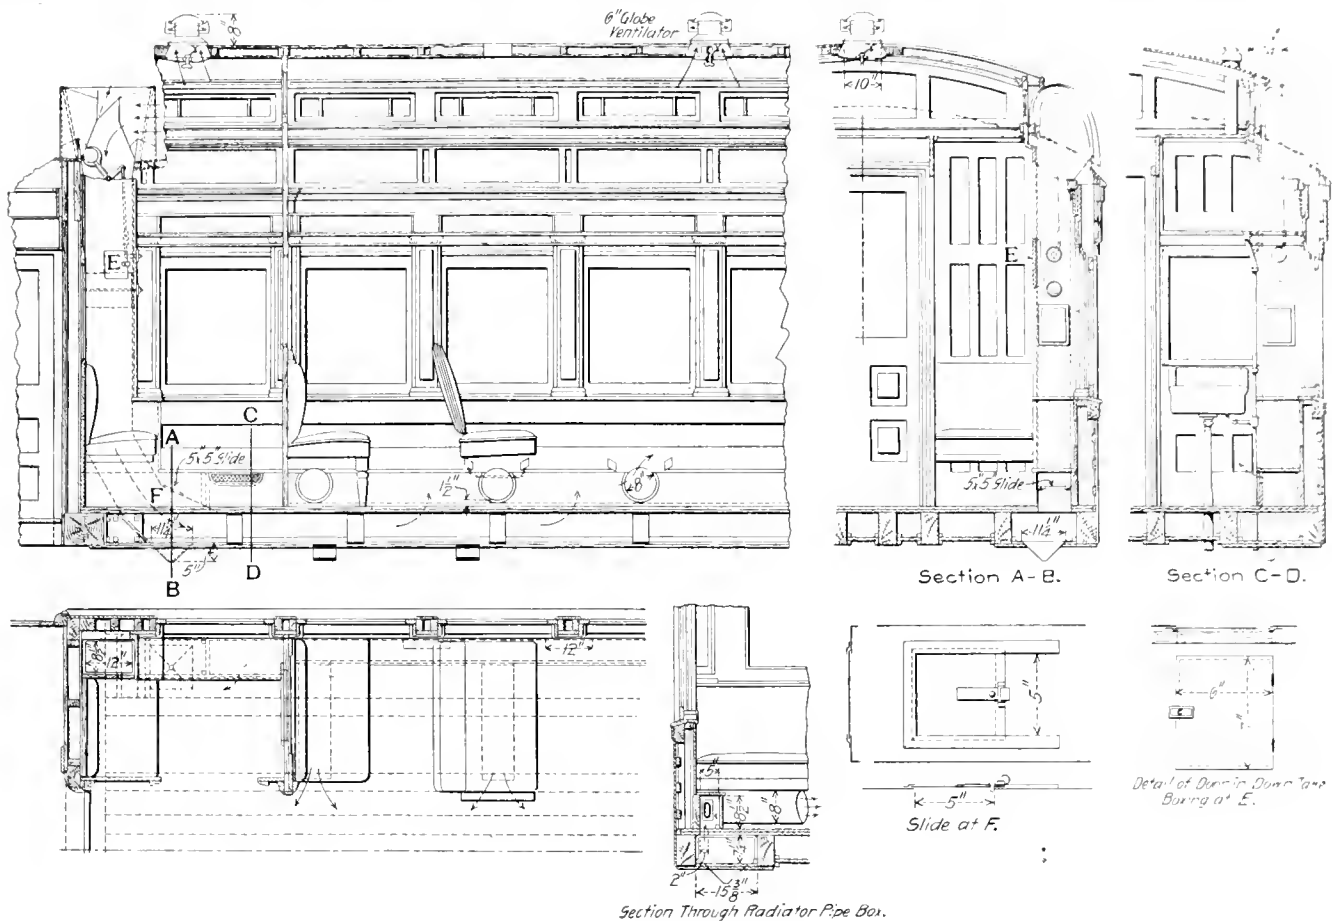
General Plan of Ventilating System for Passenger Cars—Pennsylvania Railroad.
